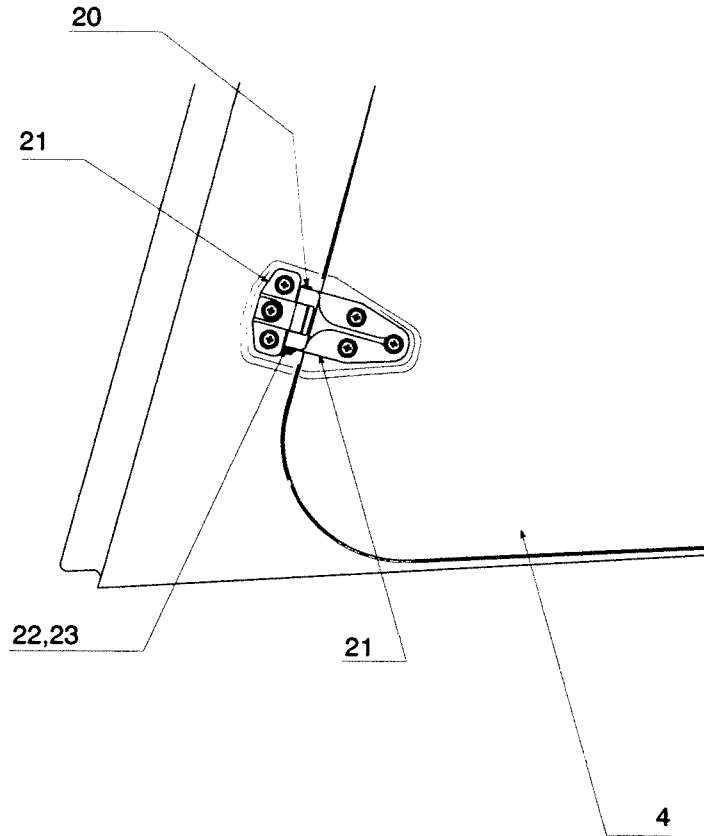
Cargo Pod Door Assembly (Sheet 2 of 3)
